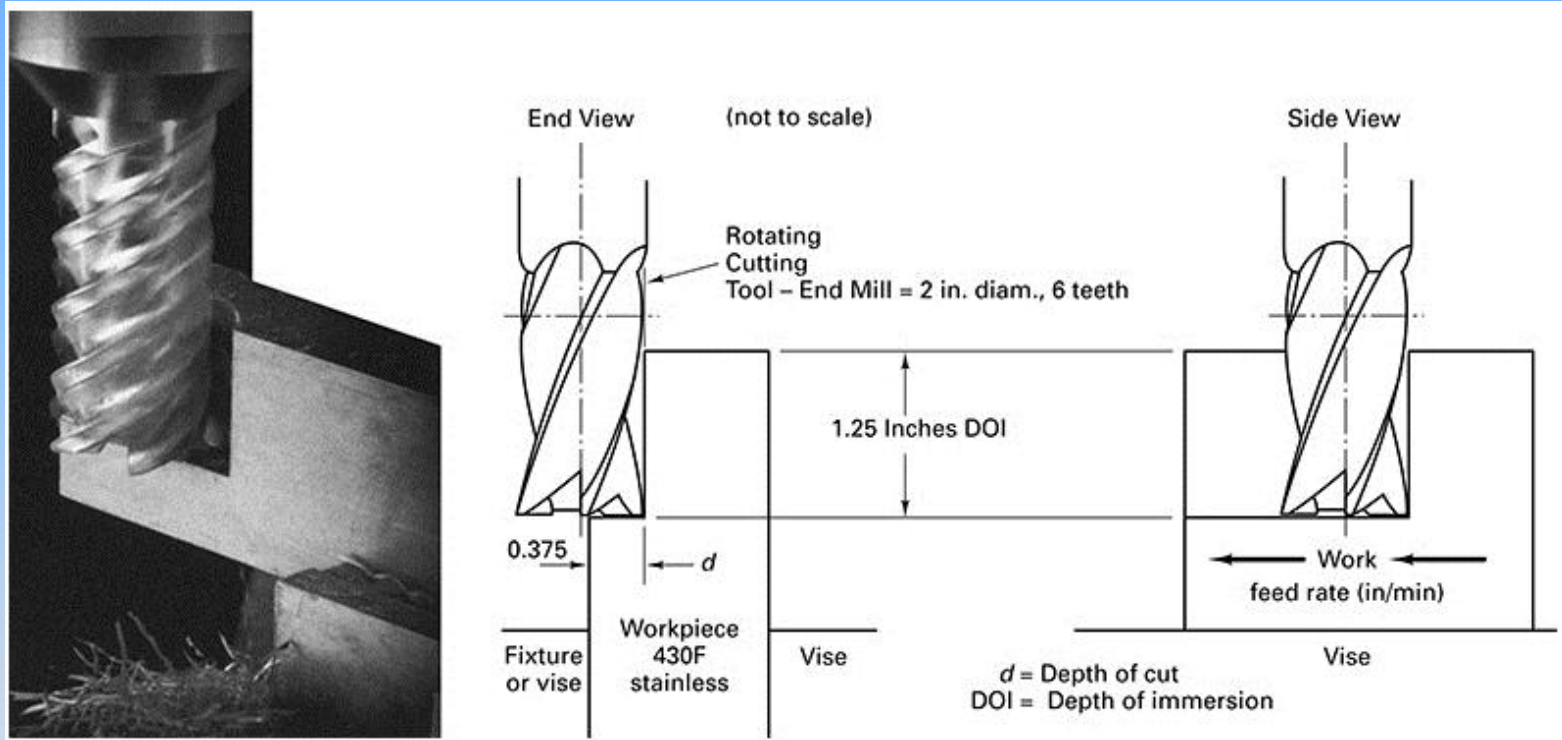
End milling a step feature in a block using a flat-bottomed, end mill cutter in a vertical spindle-milling machine. On left, photo. In middle, end view, table moving the block into the cutter. On right, side view, workpiece feeding right to left into tool.
